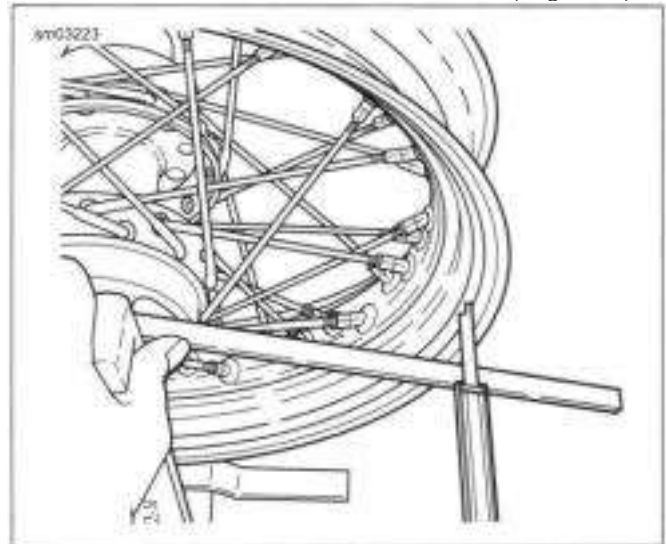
Checking Wheel Hub Offset Dimension (Typical)
